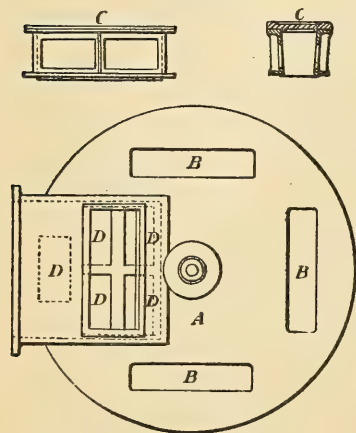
Cover and Valve Boxes for Blowing Cylinder.
